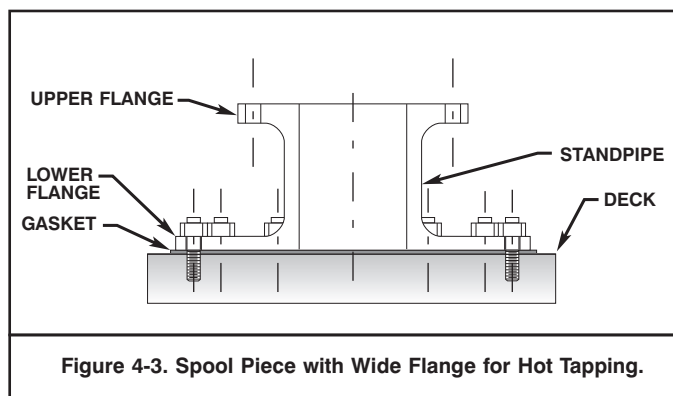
Spool Piece with Wide Flange for Hot Tapping.
